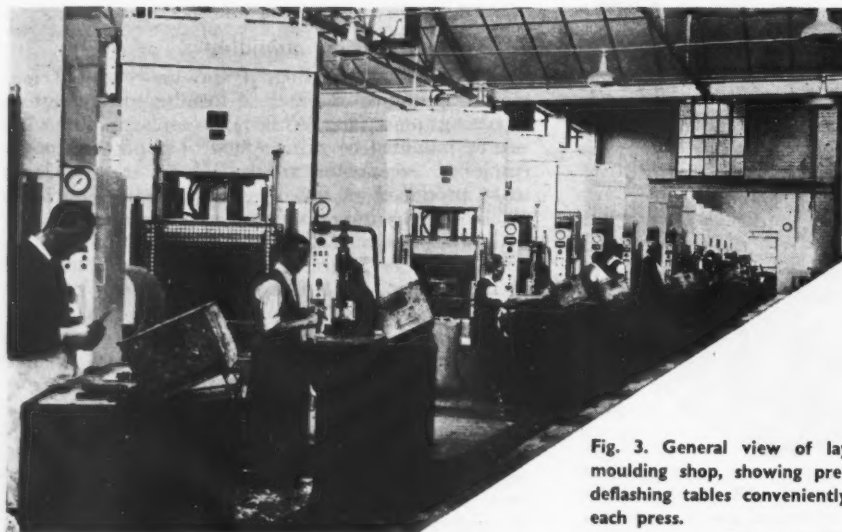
General view of layout of a typical compression moulding shop, showing presses in line with changing and deflashing tables conveniently arranged for the operator at each press.
